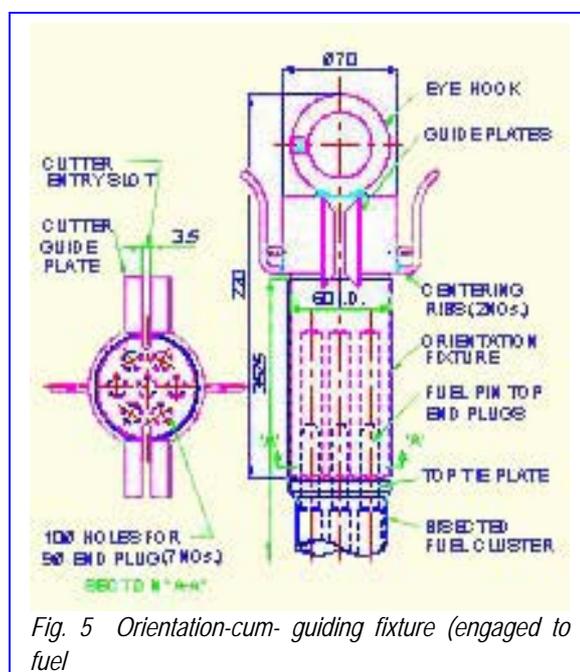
Orientation-cum- guiding fixture (engaged to fuel)
